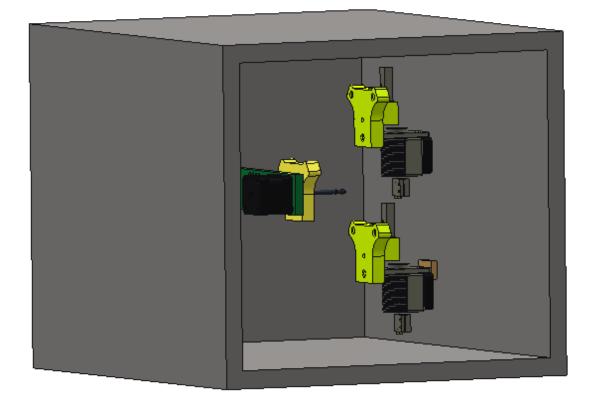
MHI 3D printer frame showing various hotend assembly for automatic tool changing mechanism
